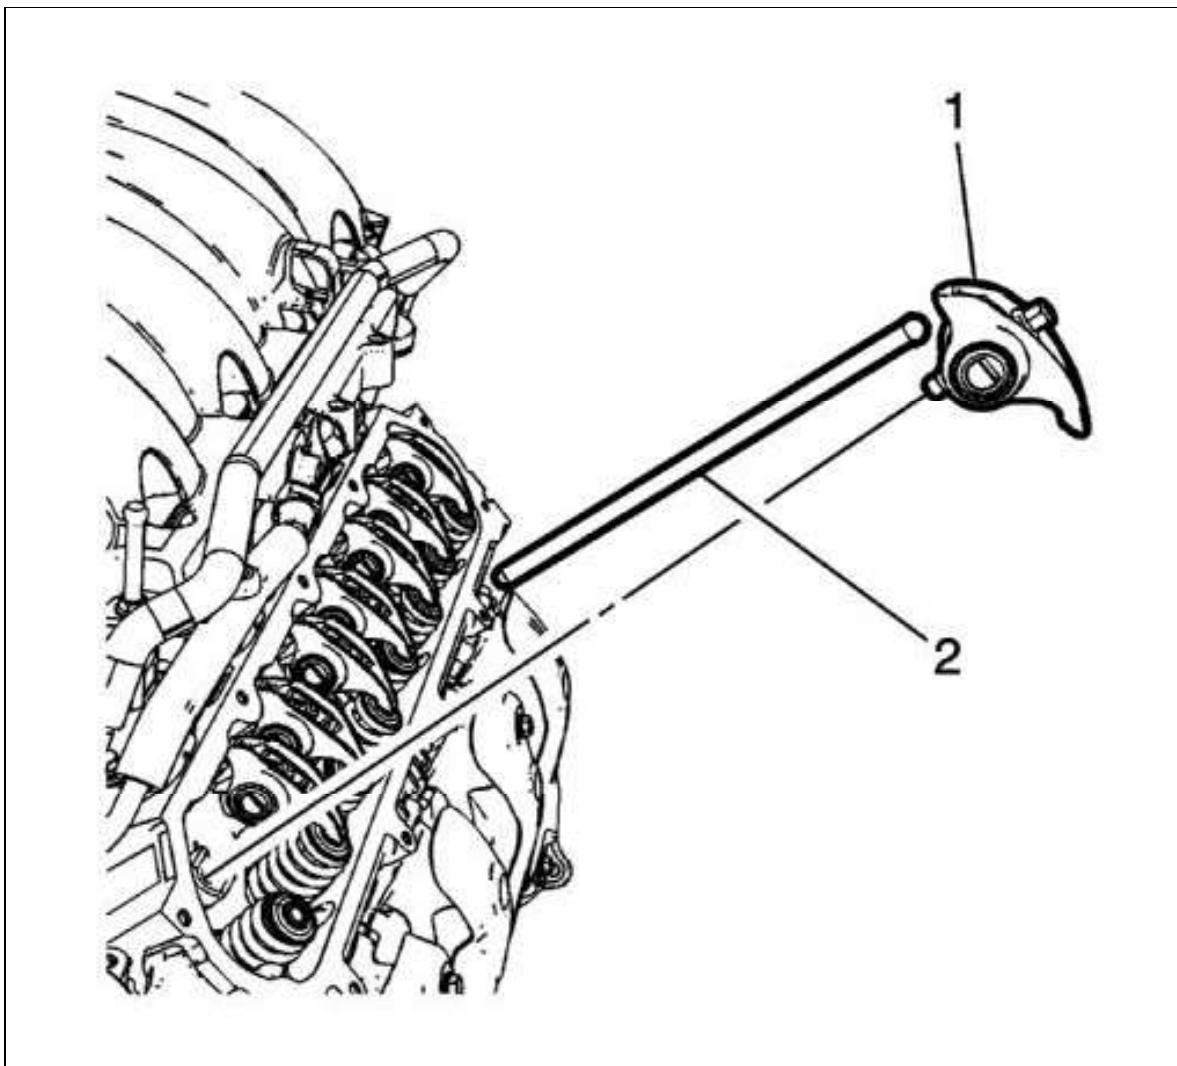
Pushrod Socket, Roller Pivot & Valve Stem Tip
